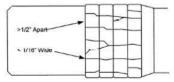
illustrates an acceptable configuration of transverse cracks. Crack widths are less than 1/16" and cracks extending the full width of the hardband deposit are greater than 1/2" apart.
